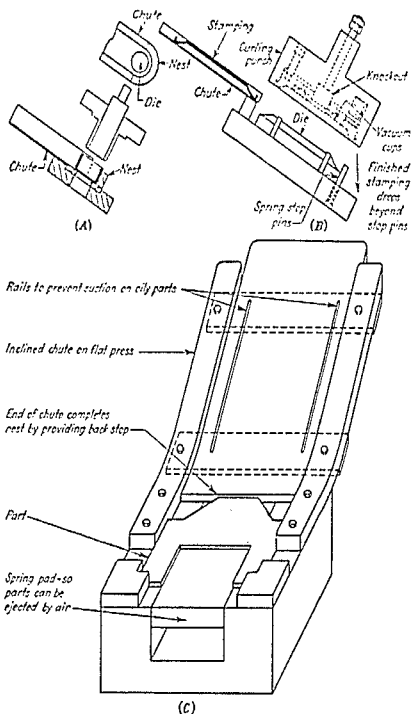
Gravity-chute feeds: (A) for redrawing cups;² (B) for stampings;² (C) for flat blanks.¹
